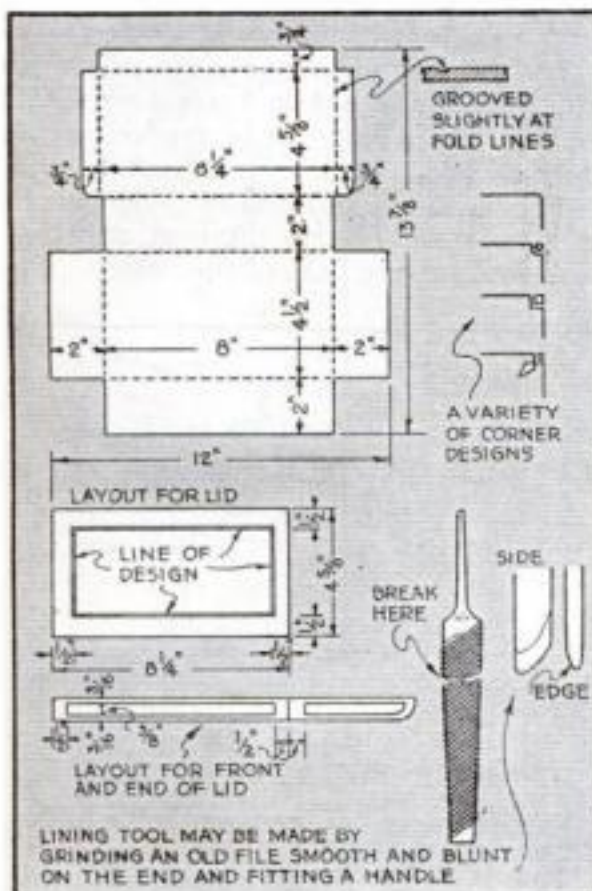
The layout for the case, four corner designs, and a suggestion for the tooling iron.
